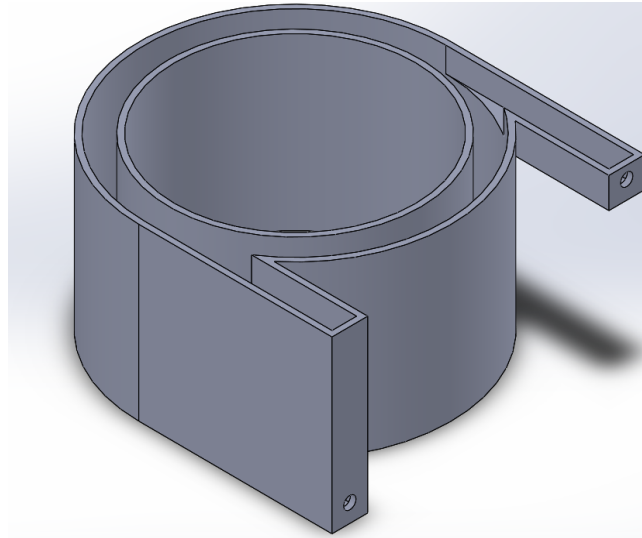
3D model of the PCM storage tank drawn by using SolidWorks
